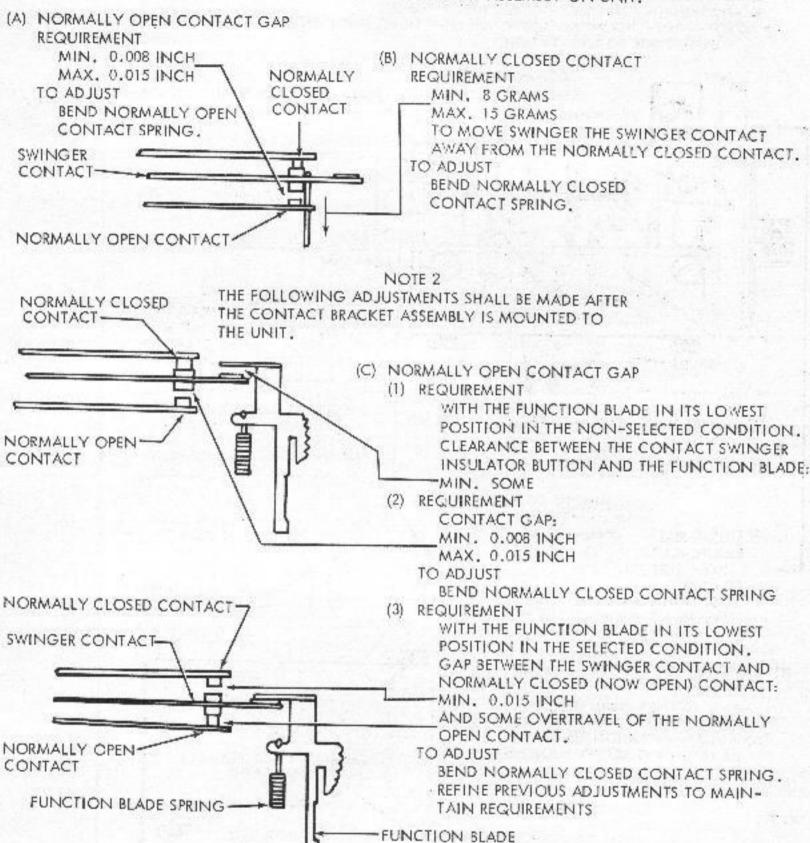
AUXILIARY CONTACT MECHANISM
